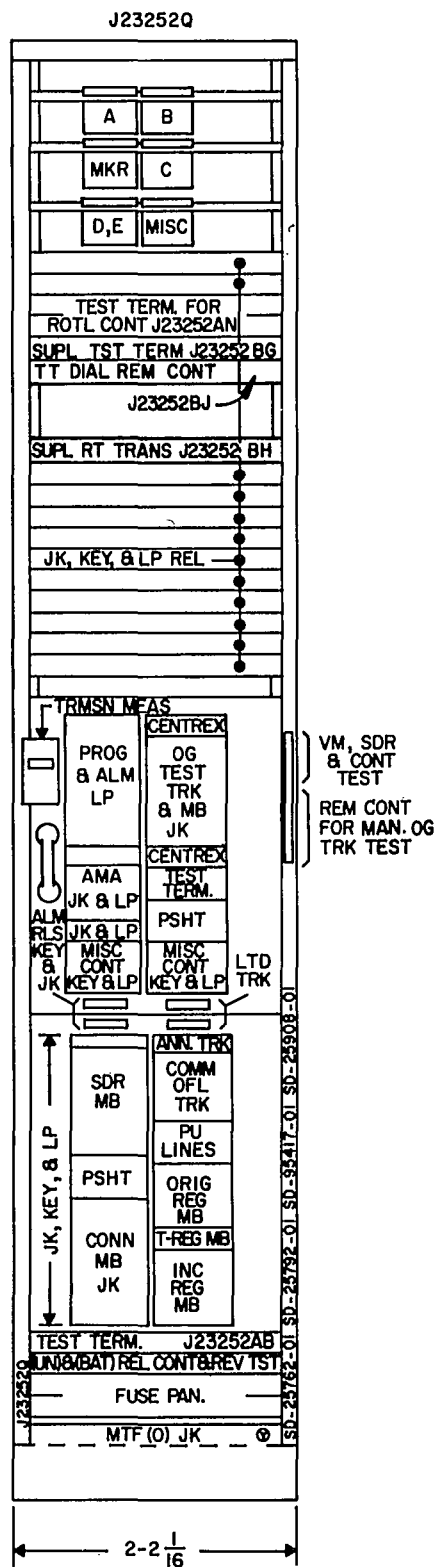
Master Test Frame Jack Bay—For Use in Offices Having the Office Test Frame—J23252Q
